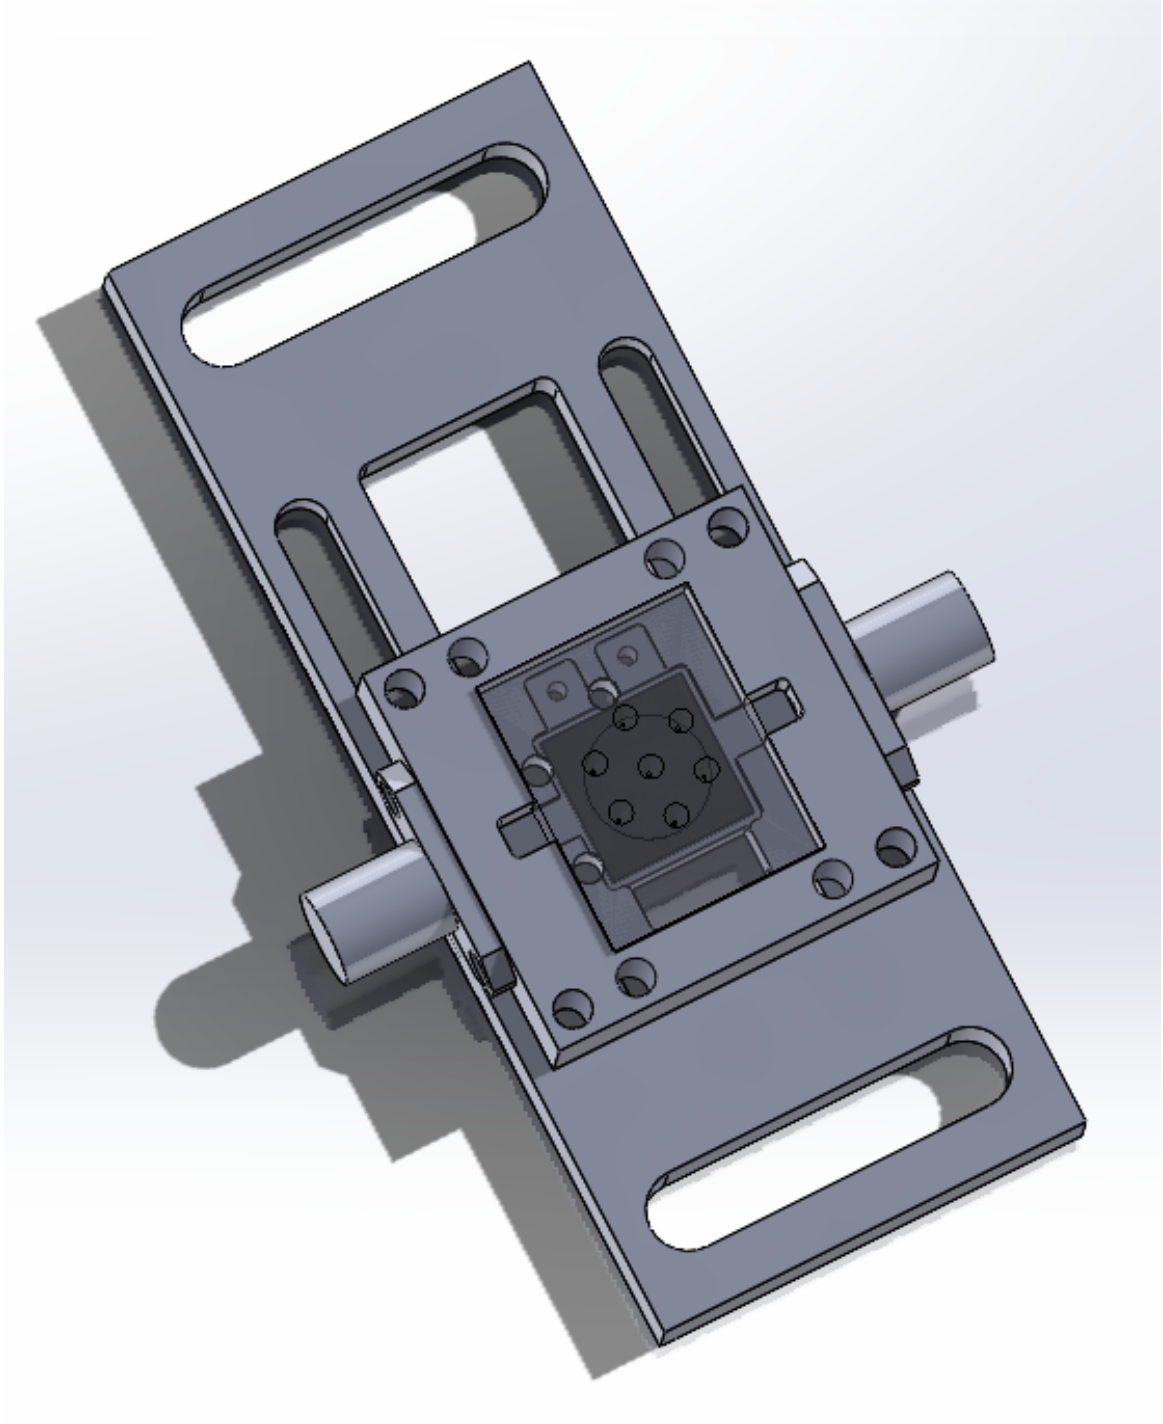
Rendering of the assembled test box including coaxial flanges. The system is designed to maintain alignment with thermal contraction in the feedhorn block, and the alignment pins also serve as the bumpers for the test chips. The design includes a 3.5 mm slot to allow one to push the test chips against the alignment pins.
